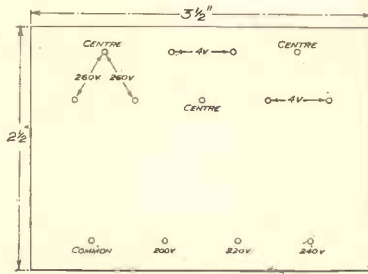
SUGGESTED LAYOUT OF TERMINAL BOARD.
